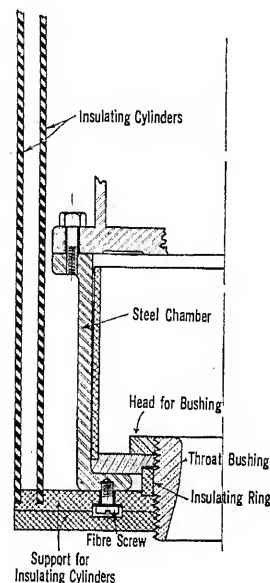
EXPLOSION CHAMBER ASSEMBLY USED IN 136B BREAKER ON TESTS 27 TO 35 INCLUSIVE (DECEMBER 6 AND JANUARY 10) EXCEPT THAT THROATS USED ON TESTS 32 TO 35 WERE OF THE TYPE SHOWN ON FIG. 48
